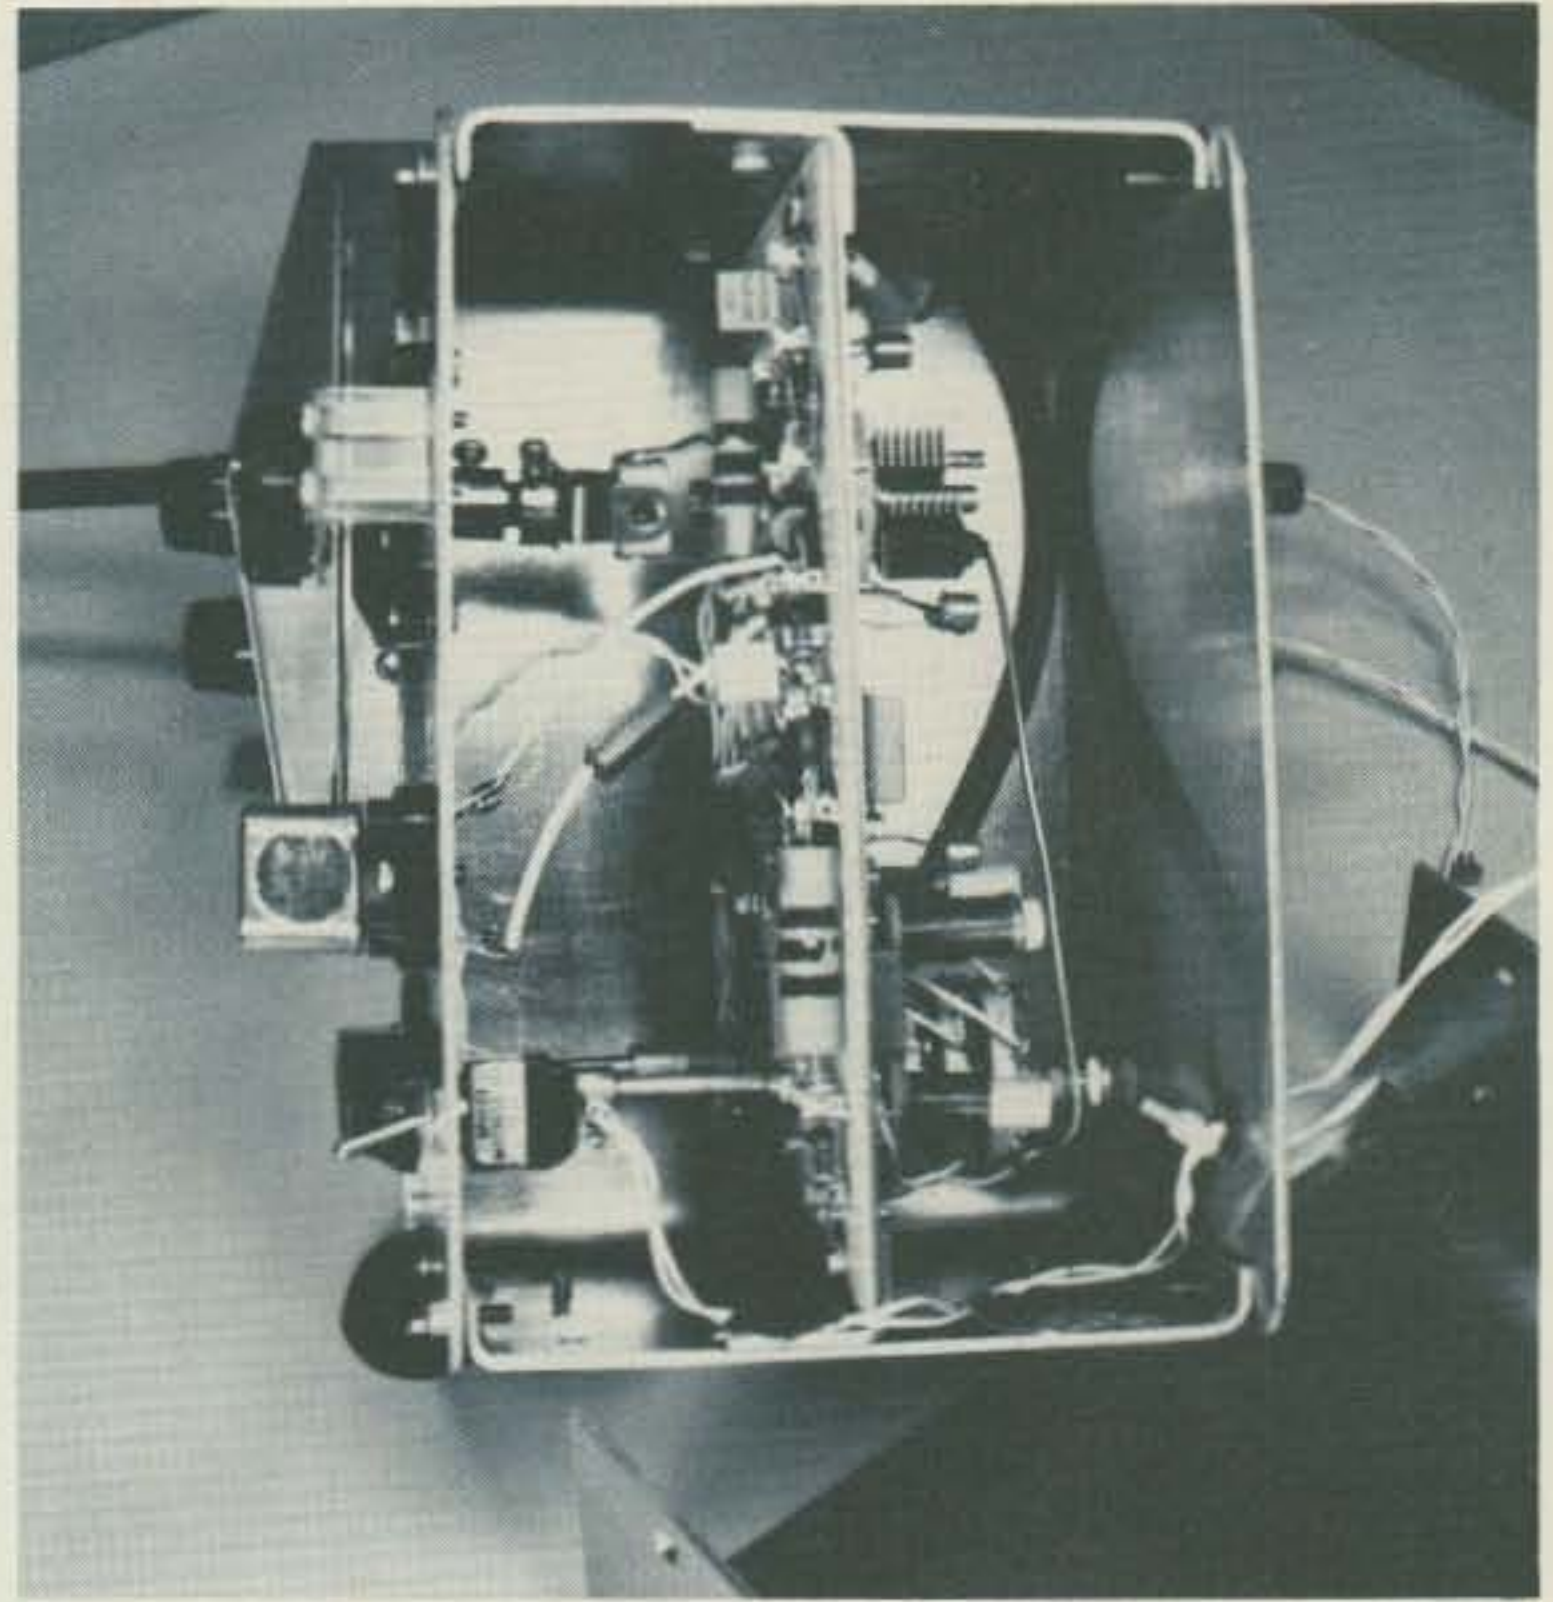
Right-side cover removed. "U" channels, top and bottom, fasten the circuit board to the cabinet front, back, and sides. A flexible coupler connects the C4 shaft to dial. S1 and R8 are hard coupled to knobs.
